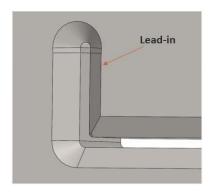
Inlet of an extrusion die plate showing the lead-in.
